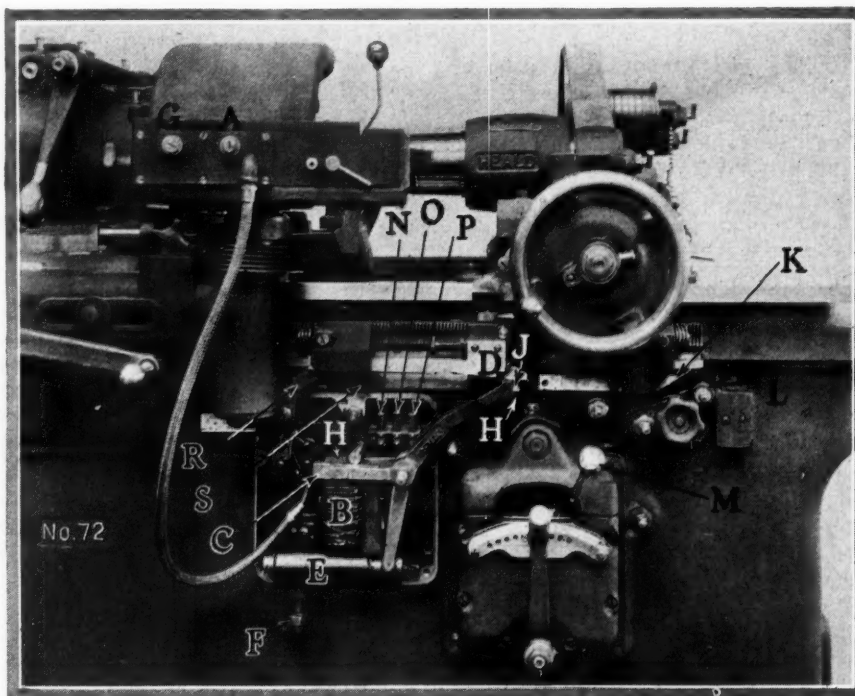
Close-up of front of grinder, magnet box cover removed, showing size indicator and operating mechanism
